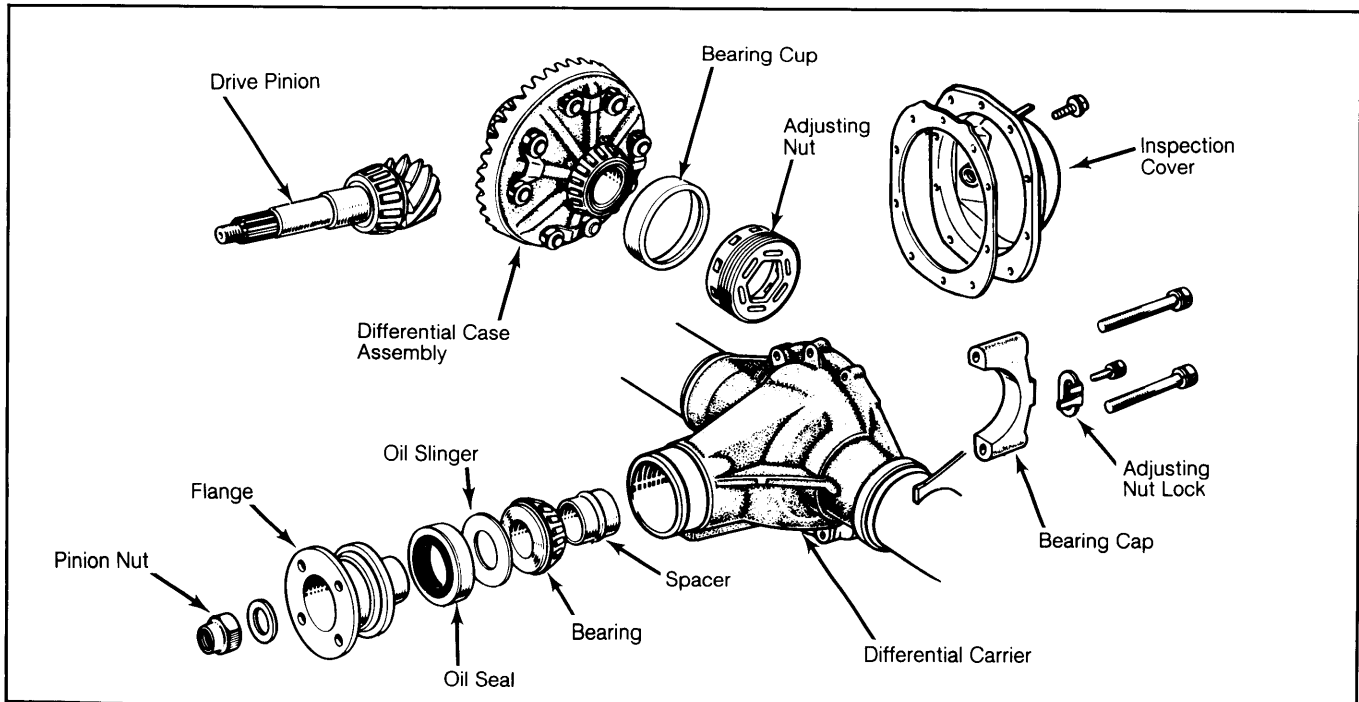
Exploded View of Toyota Integral Carrier Differential
